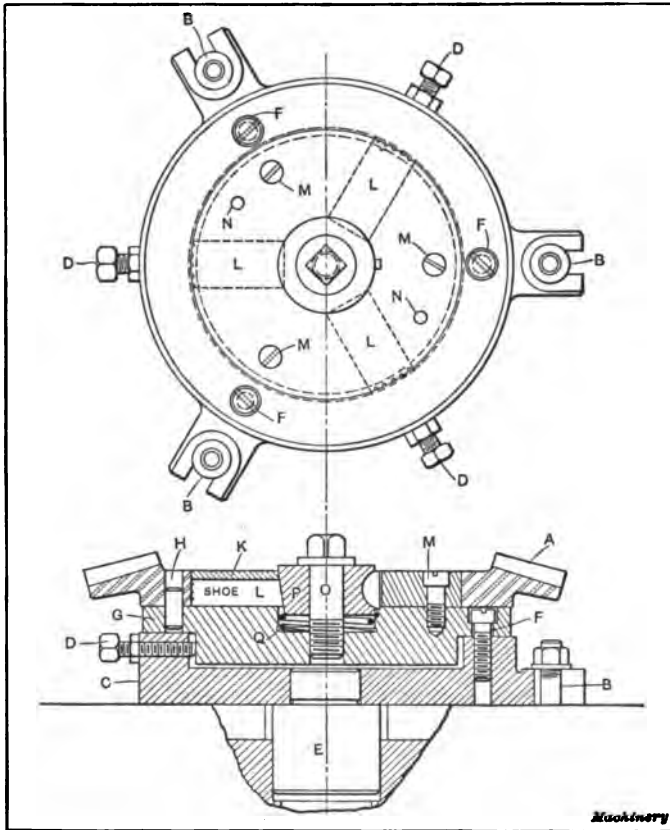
Vertical Boring Mill Fixture for Holding Bevel Gear — The Three Shoes L are forced outward by Plug in Center
